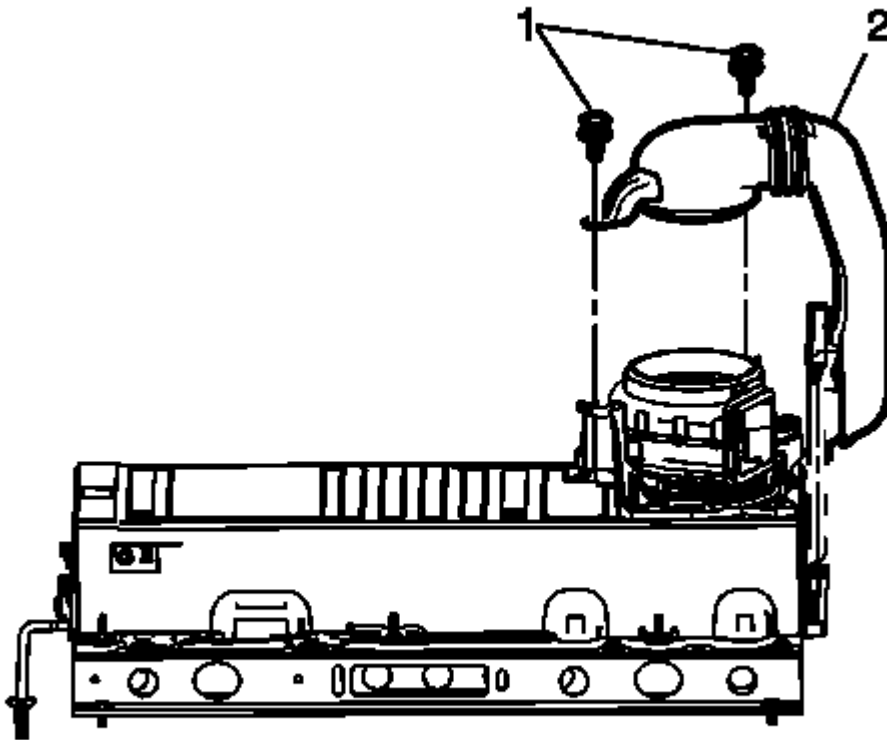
Drive Motor Battery Cooling Blower Outlet Upper Duct Fasteners
